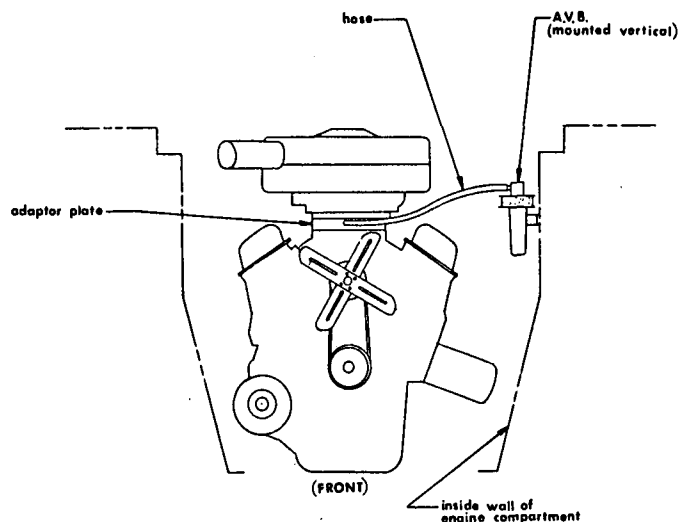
DEVICE 1 AIR BLEED TO INTAKE MANIFOLD
